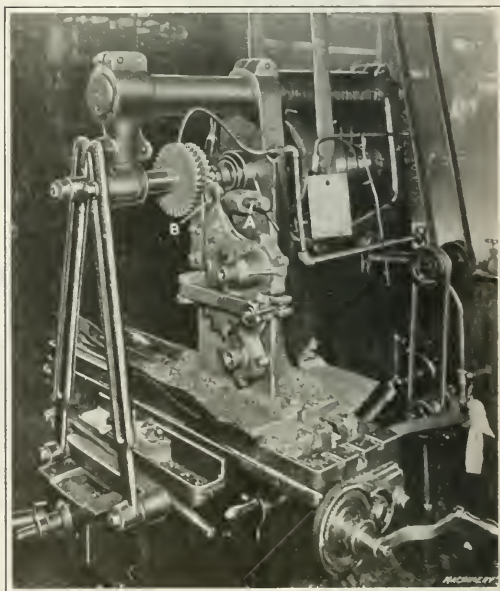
No. 1 1/2 Cincinnati Milling Machine with Fixture for straddle-milling Starter-shaft Bearing Boss on Timing Gear-case Covers
